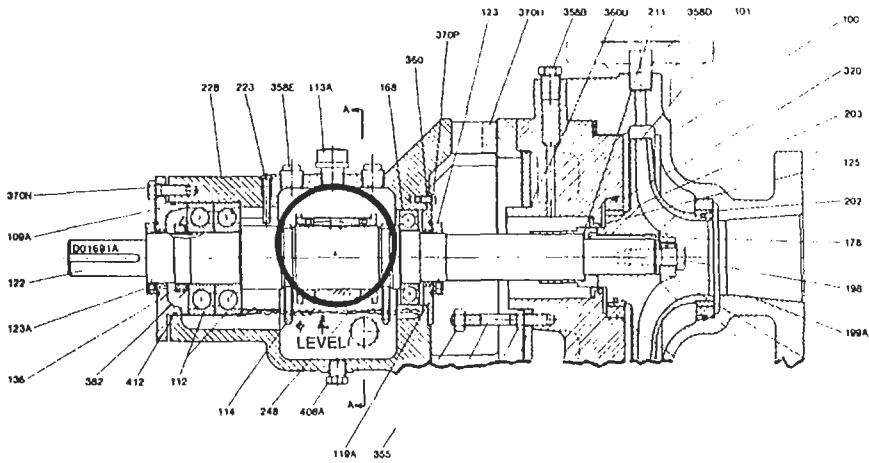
Optimum design for Goulds pumps. A single flinger spool serves to retain two oil rings. Oil pumped up by the oil rings contacts the flinger and is sprayed into the housing walls.
